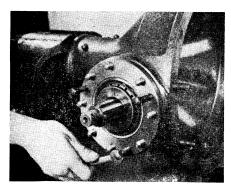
Remove pinion and cage, using puller screws in holes provided
